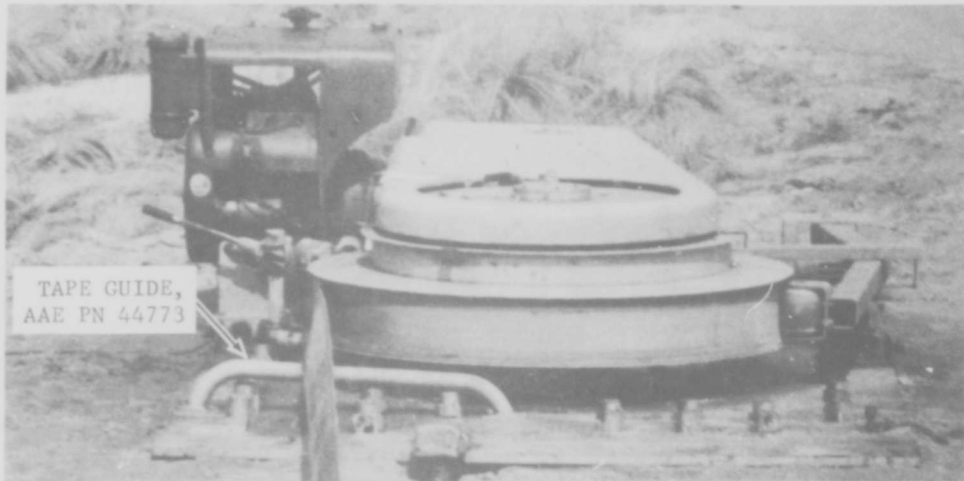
Tape Guide Replaced by Guide-Sheave Assembly
